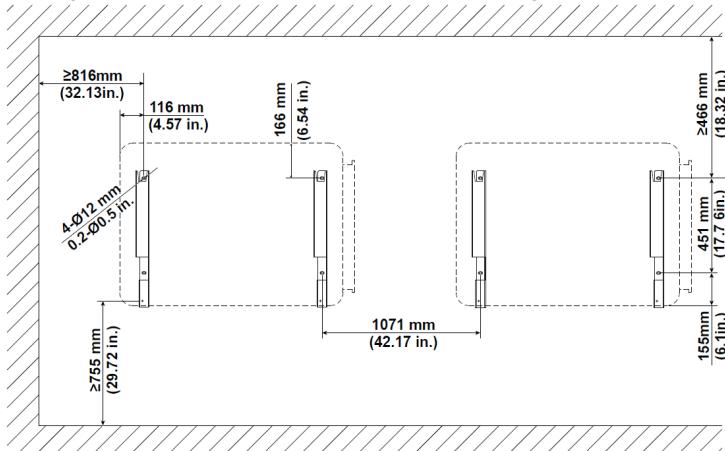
Hole Position Dimensions of Multiple Mounting Brackets
